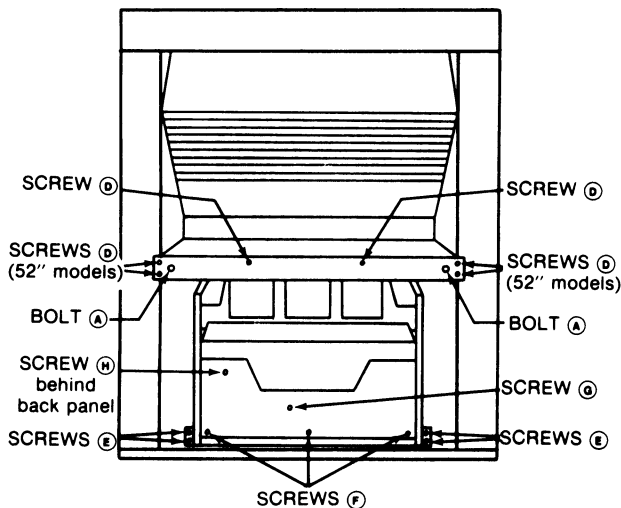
Cabinet Rear View (Backcover Removed) Models: 46GW950, P46100/150, P52150
